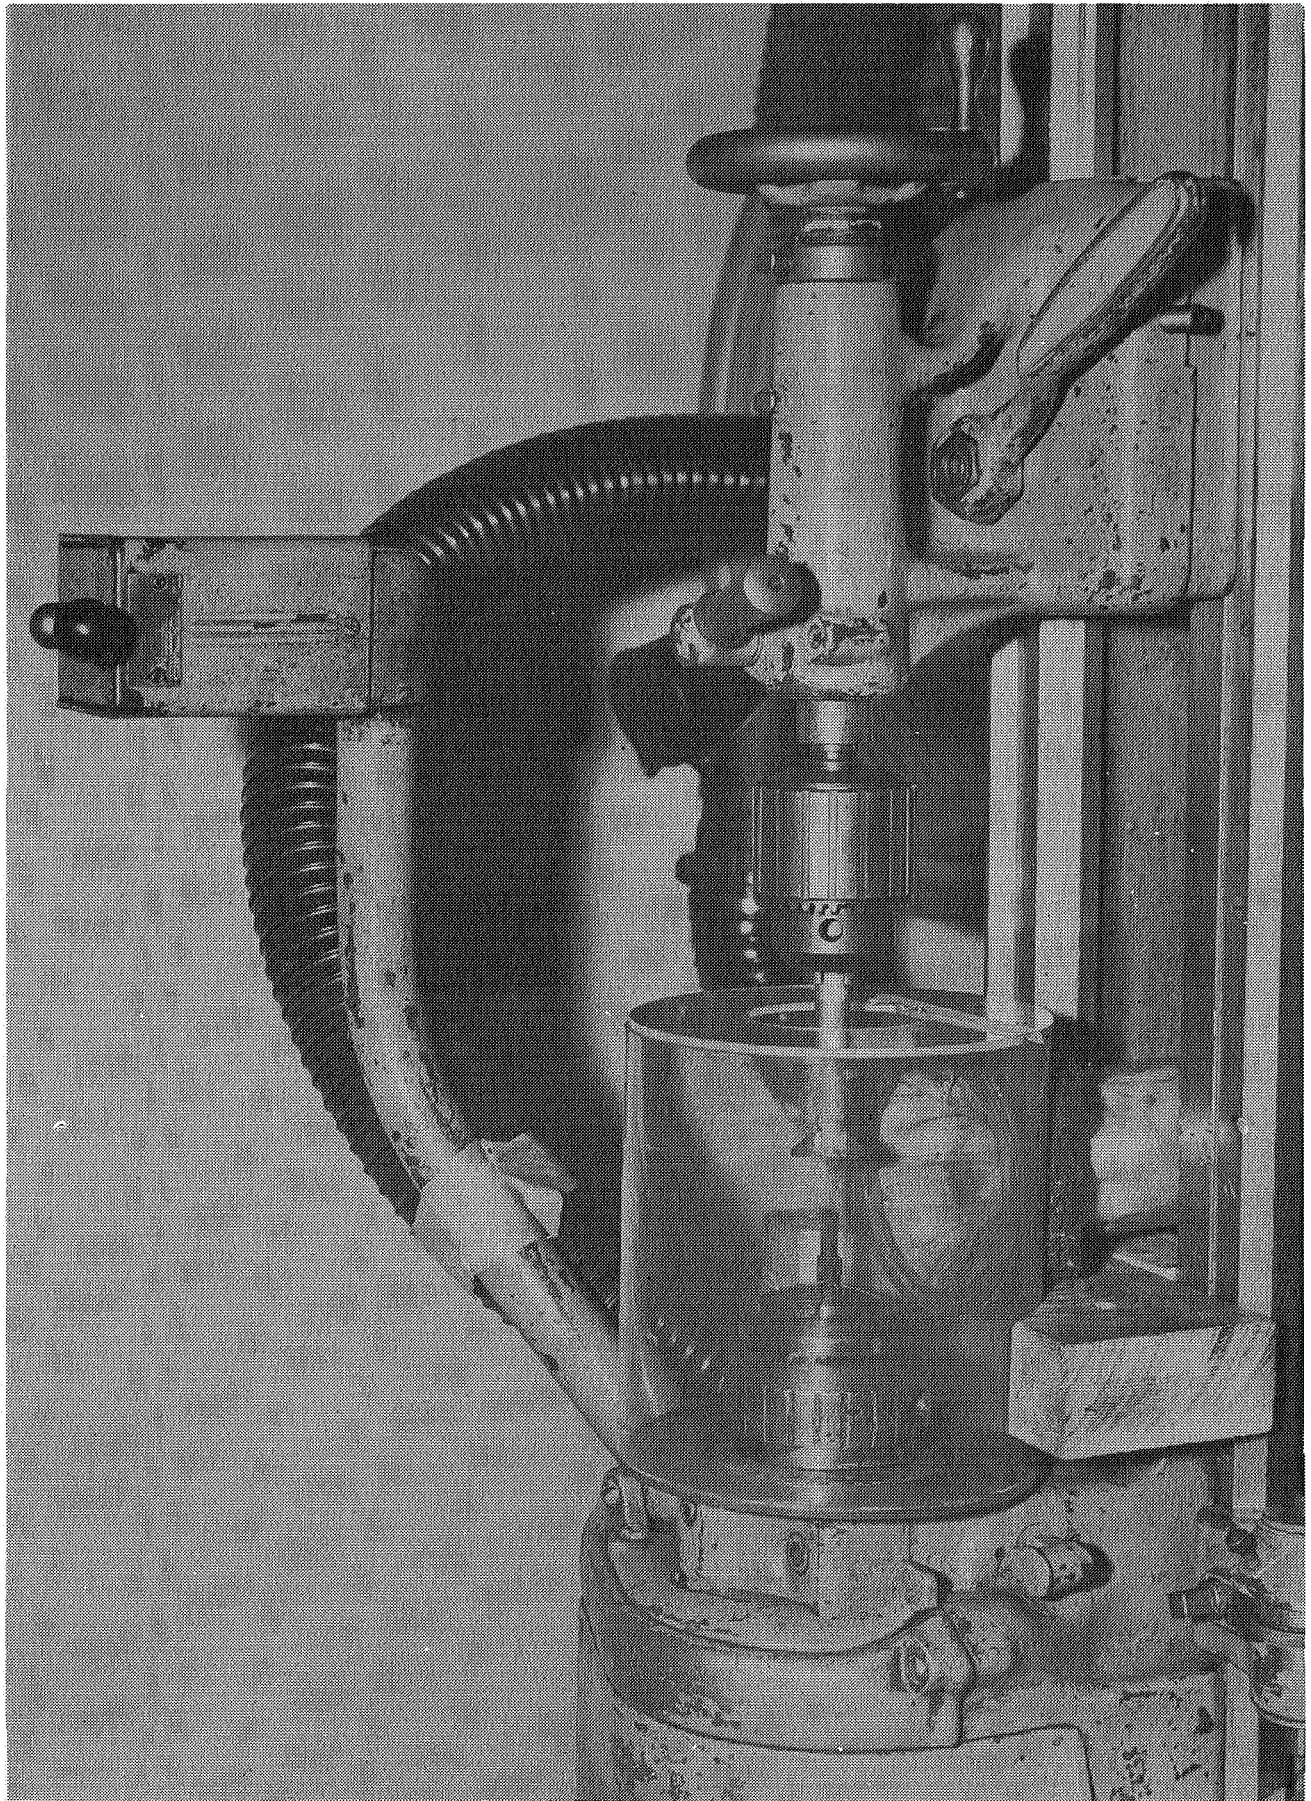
Lathe Equipped to Machine Ablation Sensors.
